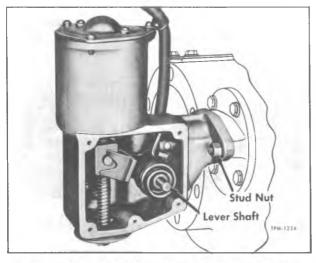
Shift Unit Cover Removed (Rockwell Axles)
